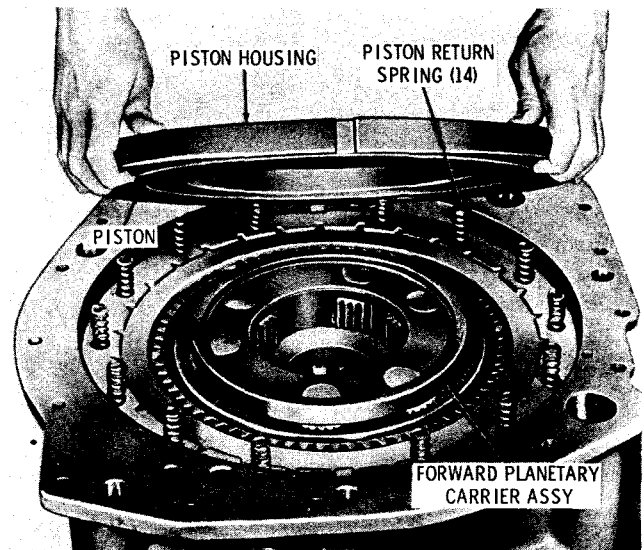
Installing forward clutch piston housing (5630 models)
